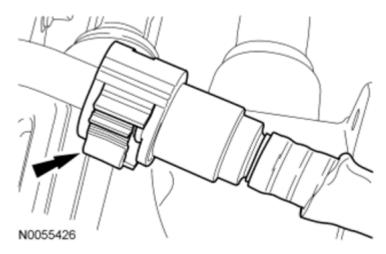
Locating Fuel Supply Tube Courtesy of FORD MOTOR CO.
